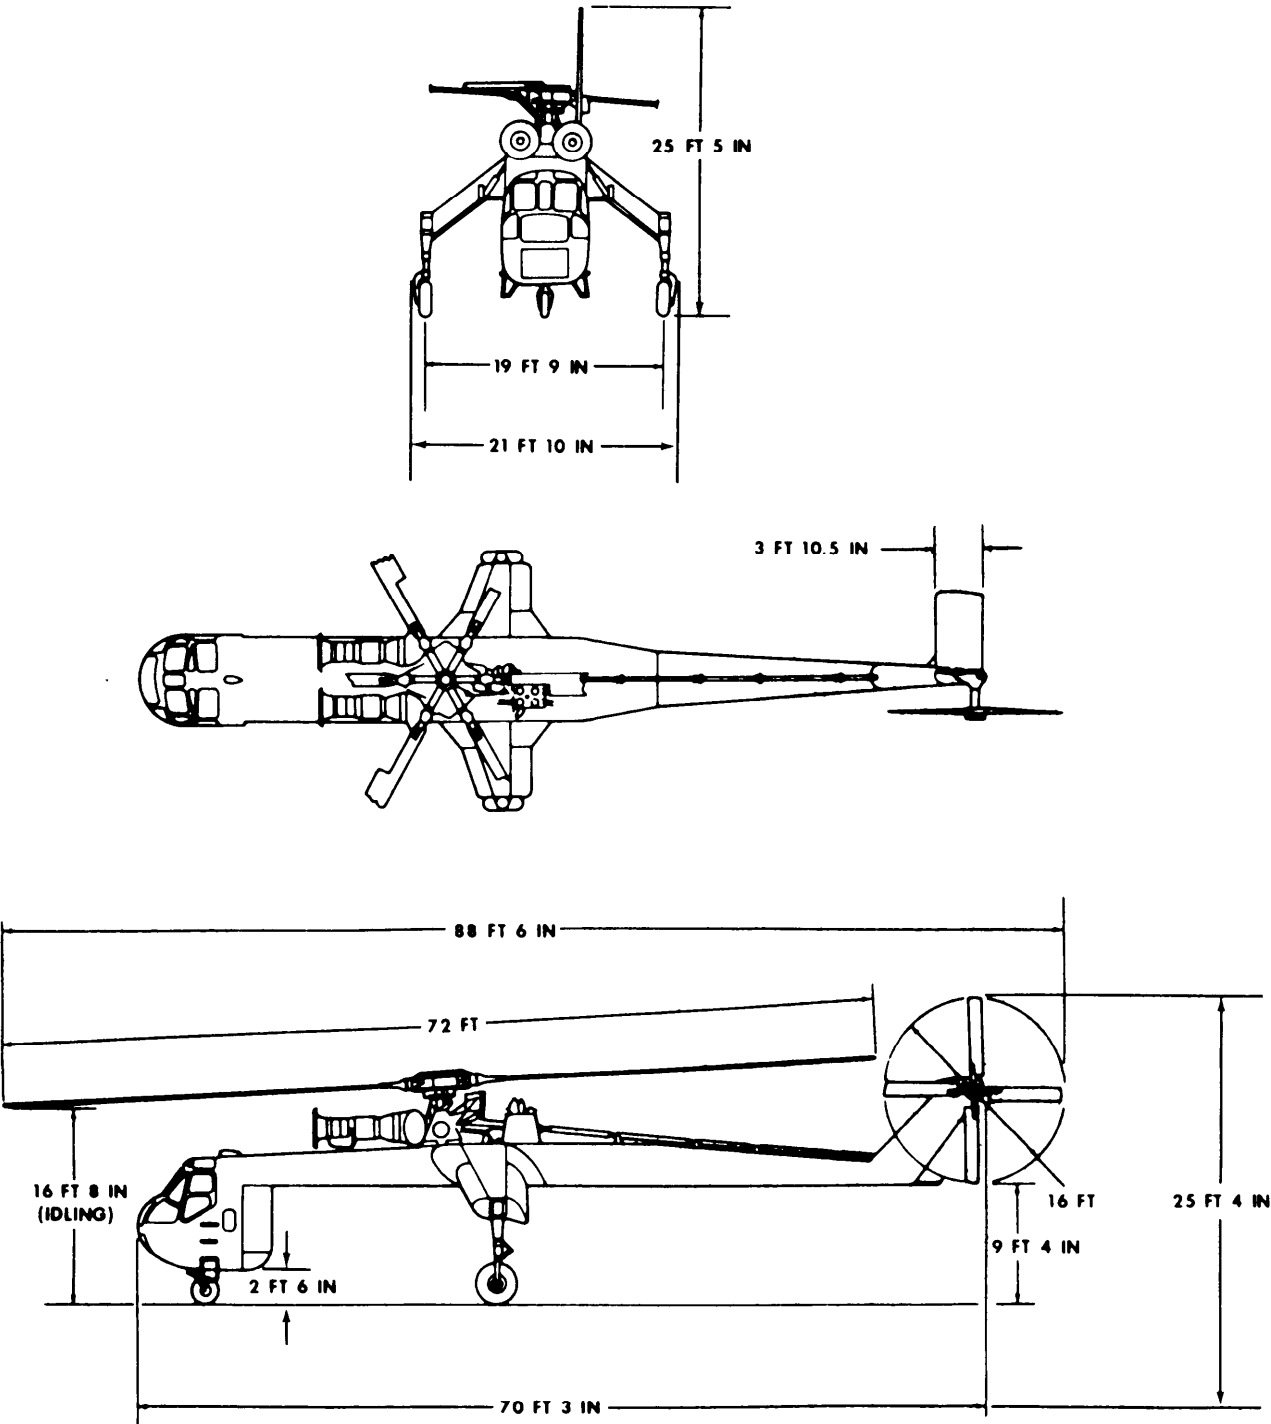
Principal dimensions, CH-54A/B (front, top, and side views).
